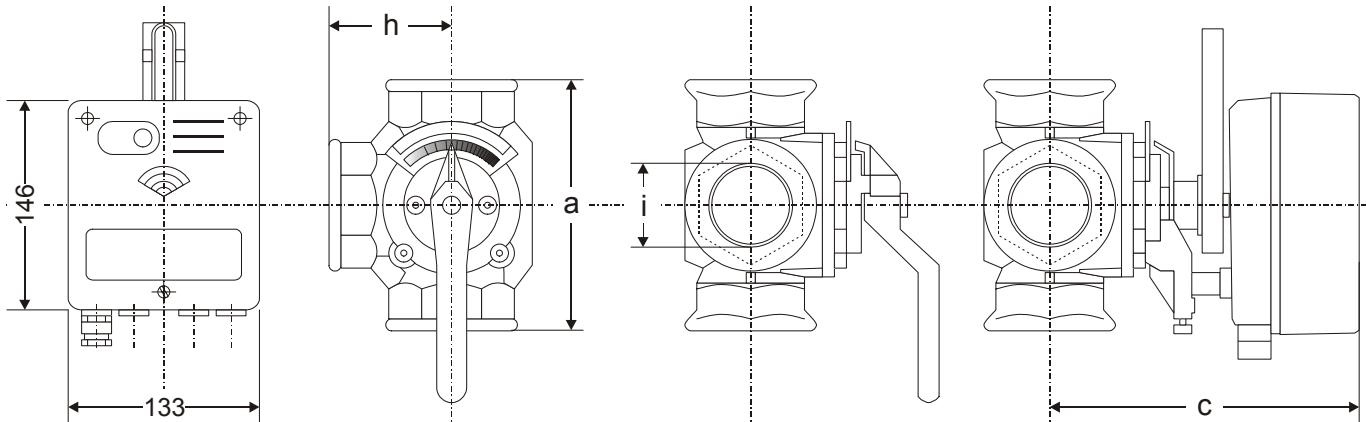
CLRA and DRxxxGMLA, dimensions (in mm)
